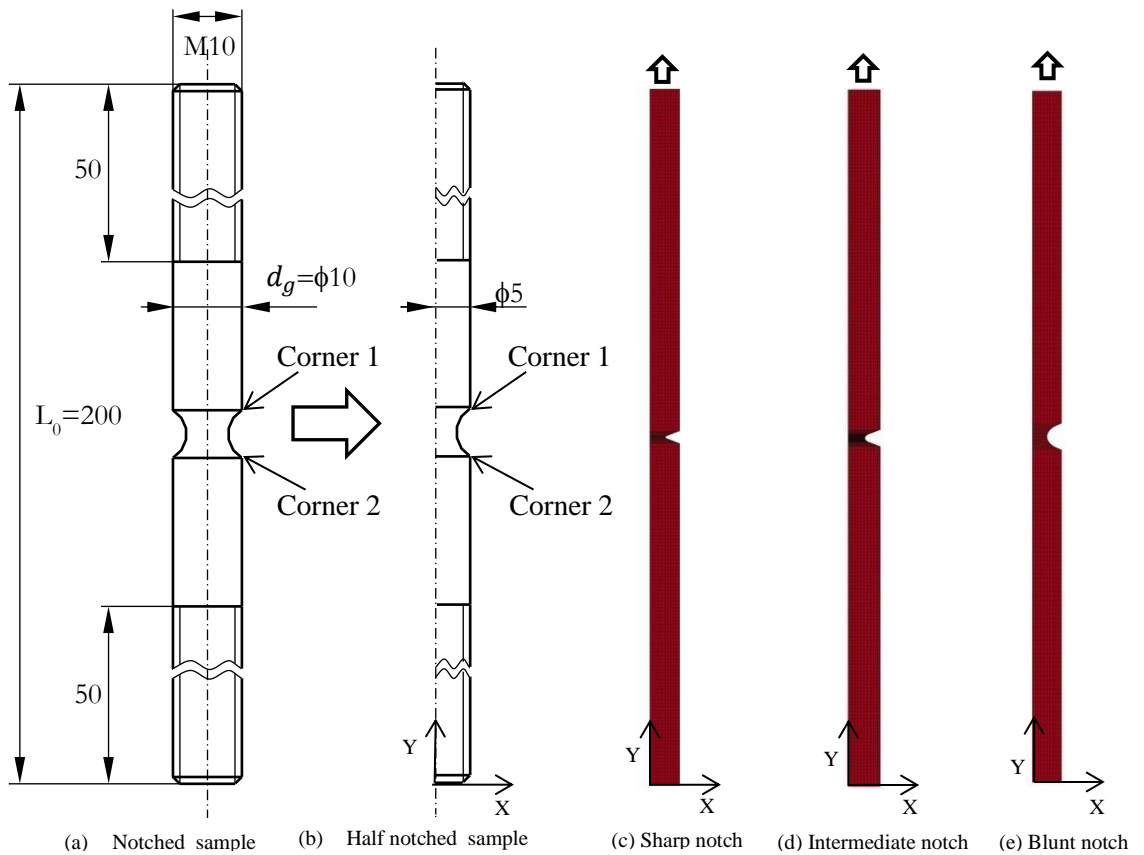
2 Schematic drawing of an Al6063-T5 notched sample and FE model (dimensions in millimetres).
